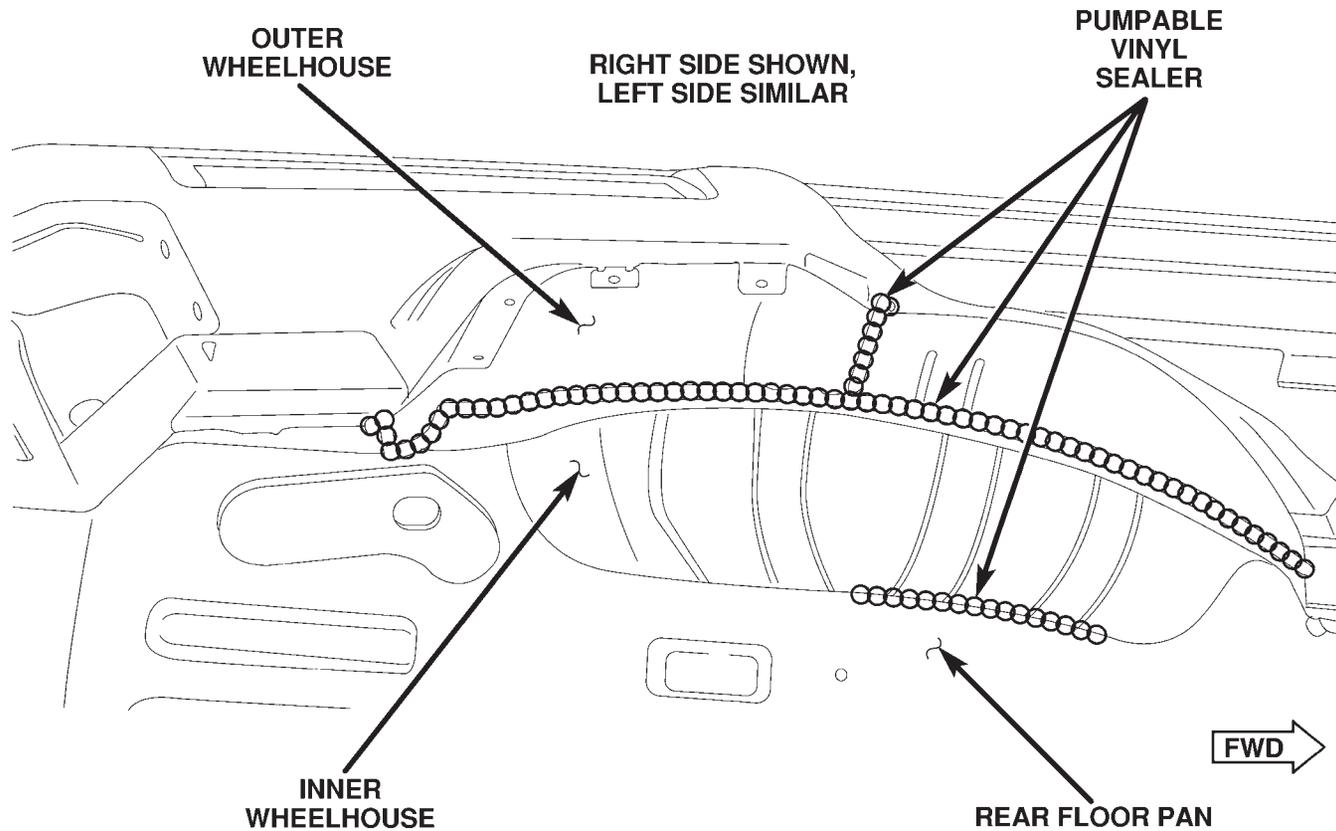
OUTER WHEELHOUSE/INNER BODY SIDE INNER AND OUTER PANEL
